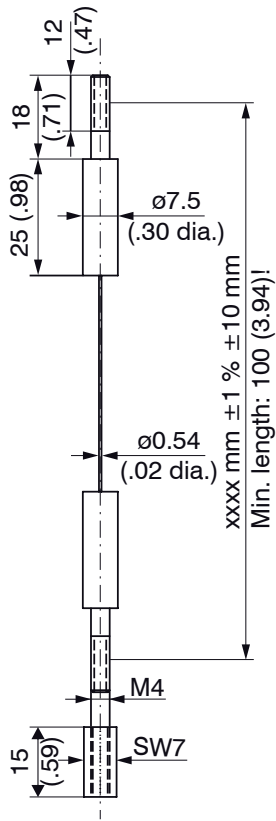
Attachment head GK1-WDS, dimensions in mm (inches), not to scale
